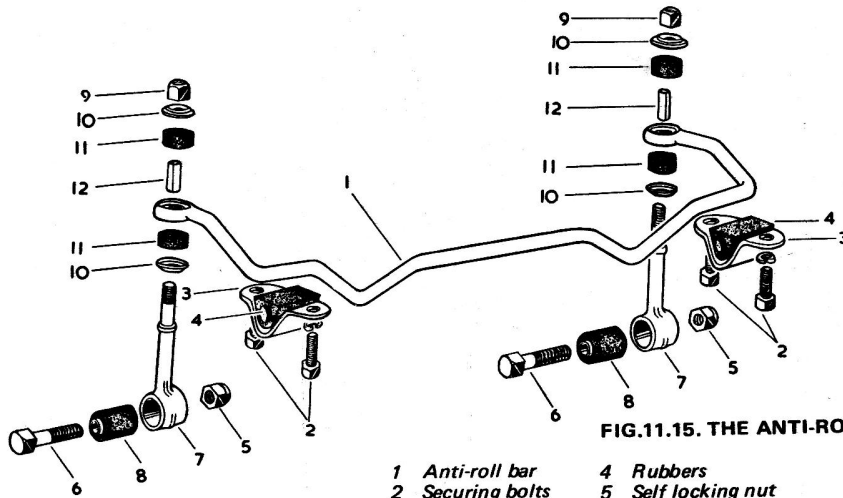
THE ANTI-ROLL BAR ASSEMBLY
